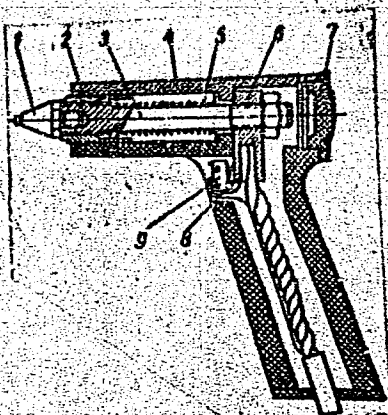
Hand torch for welding assembly spot. 1 - electrode, 3 - coupling rod, 5 - spring, 6 - contact nut, 8 - spring, 9 - microswitch. # 2, 4, 7 not identified in text.
